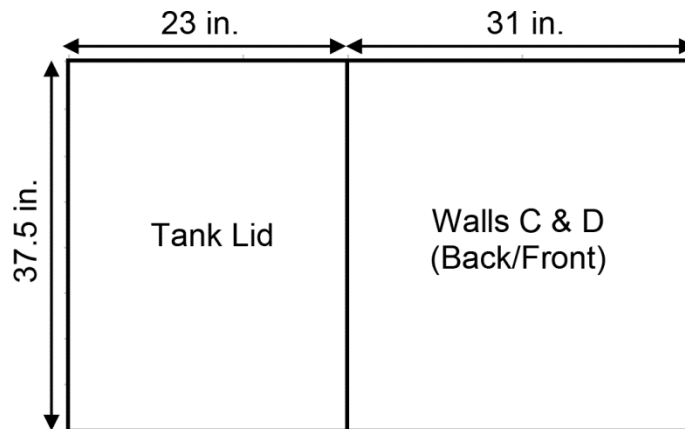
140- and 190-Gallon Tank Rubber Sheet 1 Dimensions
